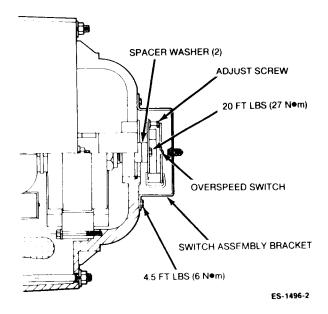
ROTOR COMPONENT ASSEMBLY/ TORQUE VALUES
